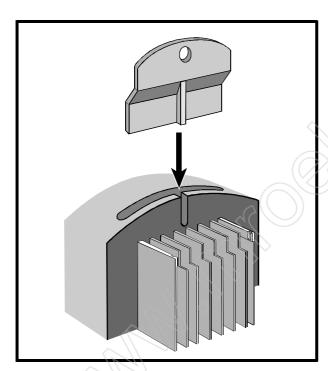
General representation showing the fitting of a through-panel mounting bracket in the top of the Drive
